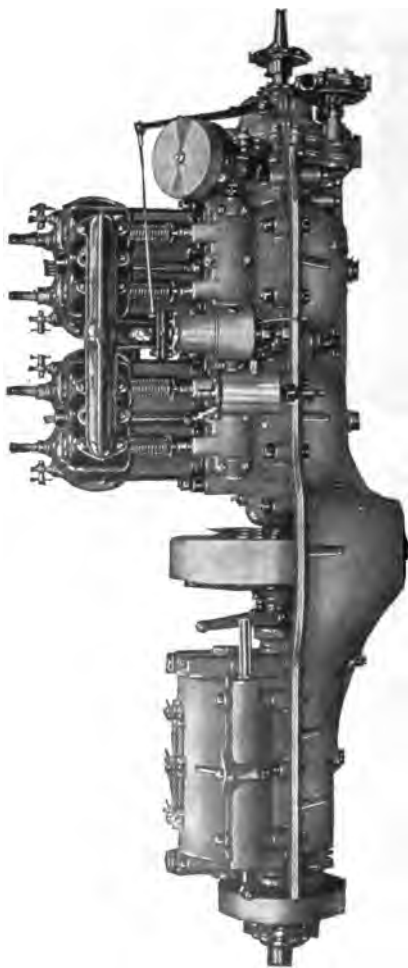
View of Engine and Gear Box of the Decauville Car, showing one-piece steel bottom casting, making it impossible for the shafts to get out of alignment.
